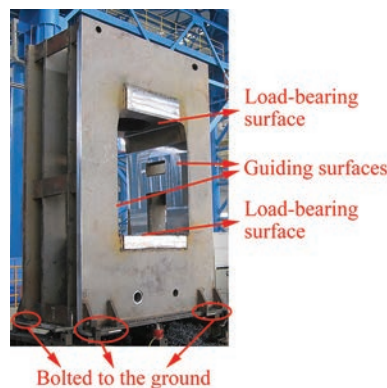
Photograph of the 12,000 kN fine-blanking press frame
